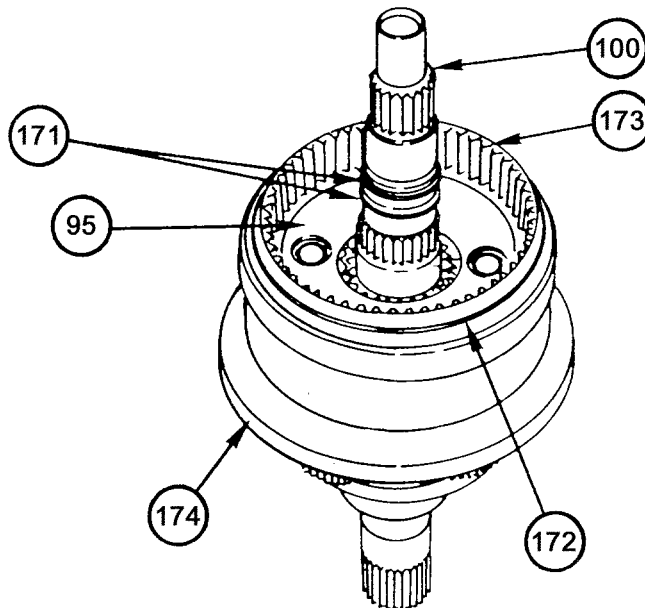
Input Shaft and Rear (P3) Carrier Assembly. (Repeated)
